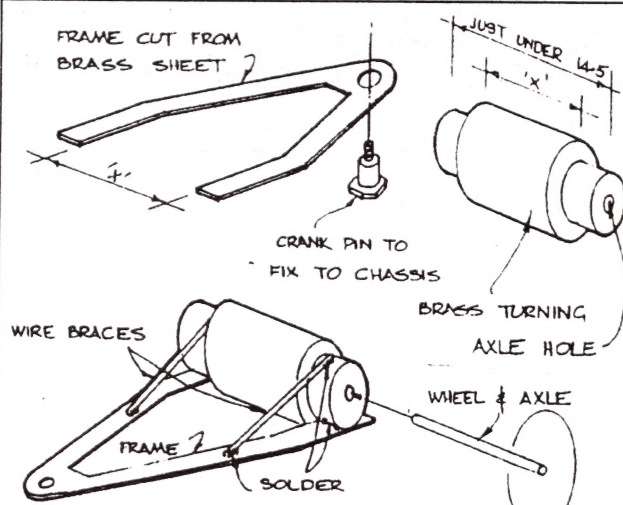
SINGLE AXLE INSIDE FRAME BOGIE.
